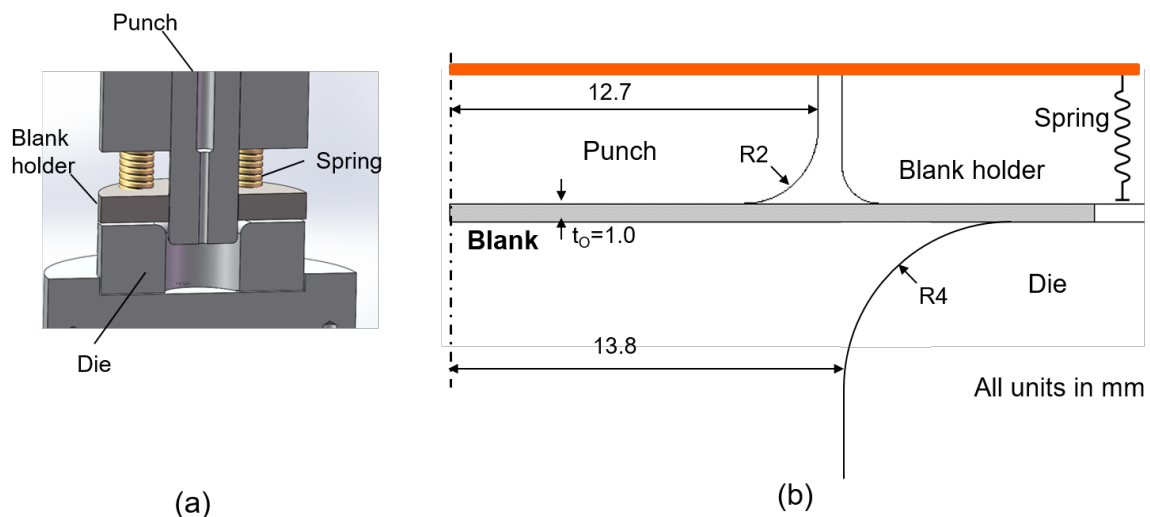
(a) Schematic of the deep-drawing tooling. (b) Dimensions of the tooling.
